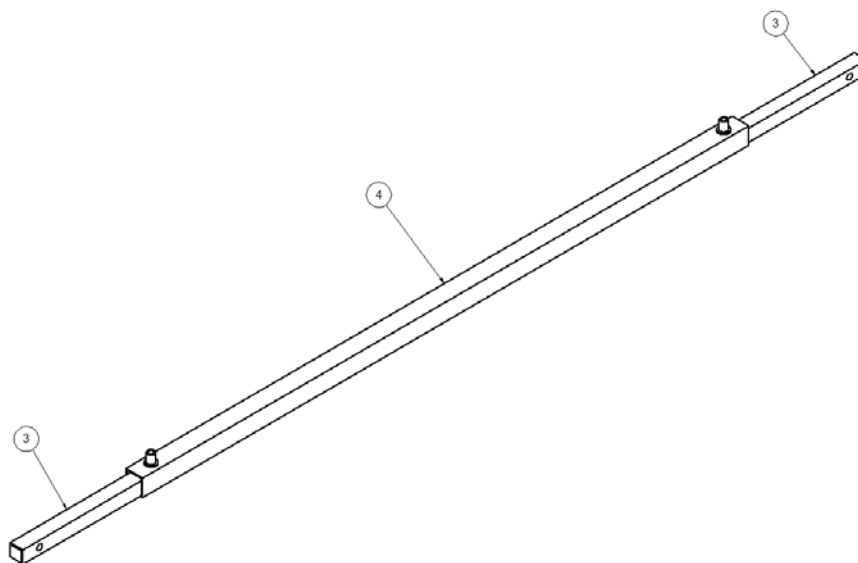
Positioning of the arm and the driving bar axle with the rest of the assembly.
